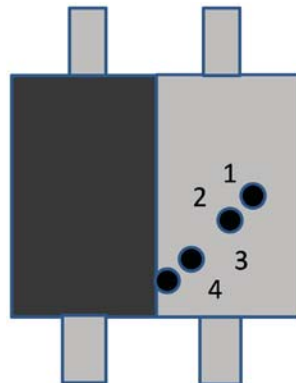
Top view with steel roll on the right showing the pressure sensors 1-4.
